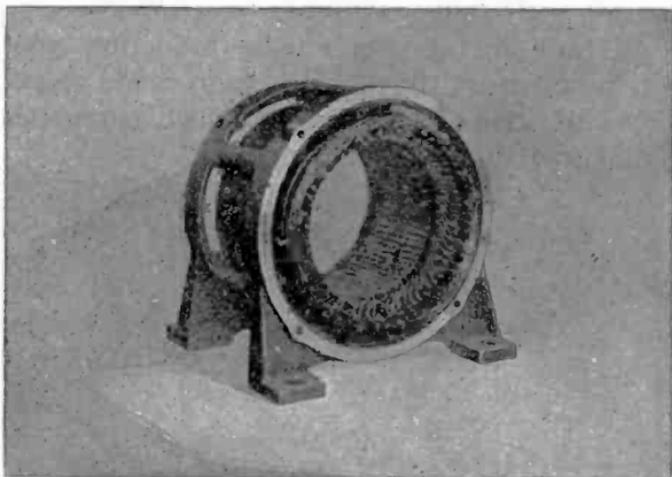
,552.—*Reliance induction motor construction 16.* Completed field with windings.
